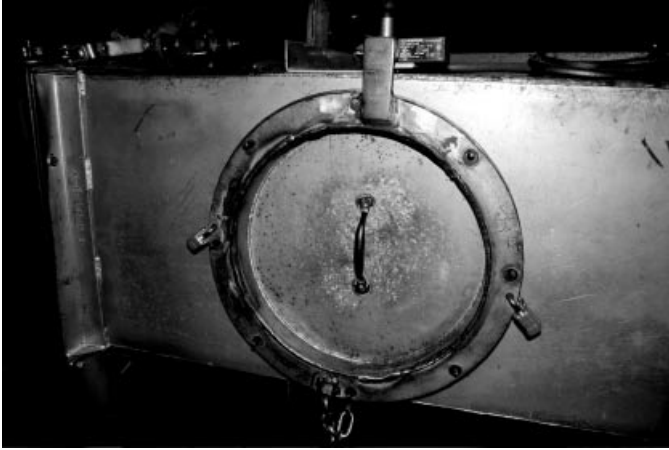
An interlocked cover is used on a duct cleanout port to prevent the operator from contacting moving parts if the cover is removed.
